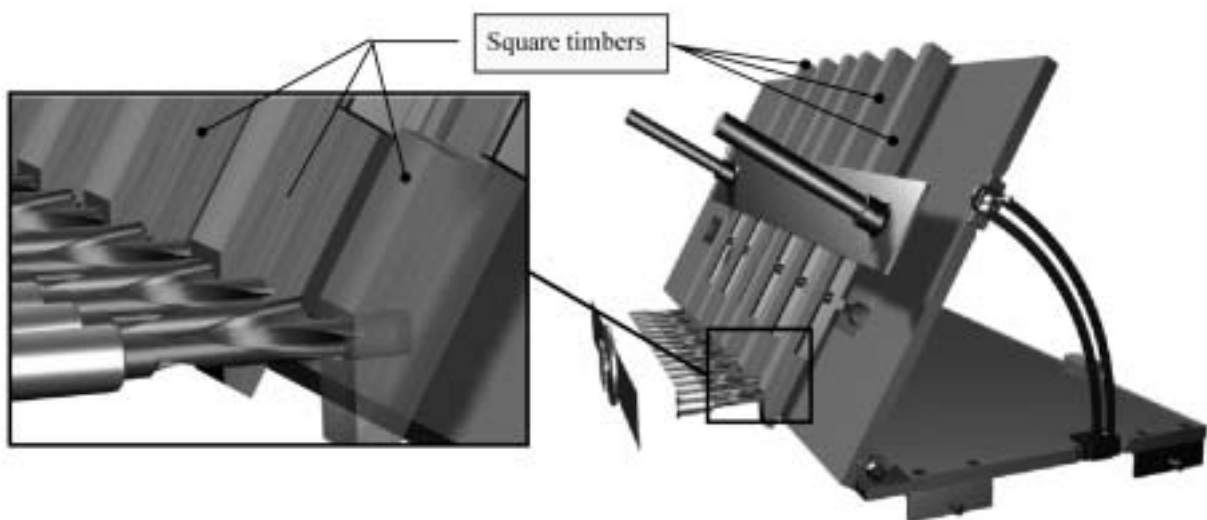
Simulation of use of instrumentation of cyclic multi-spindle drilling machine
